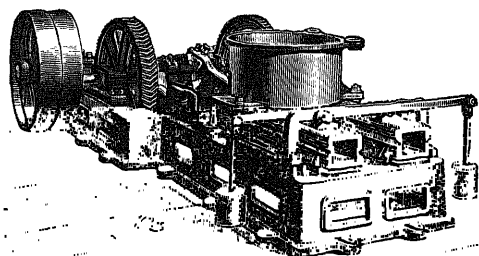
OPEN MOULD BRIQUETTE PRESS
